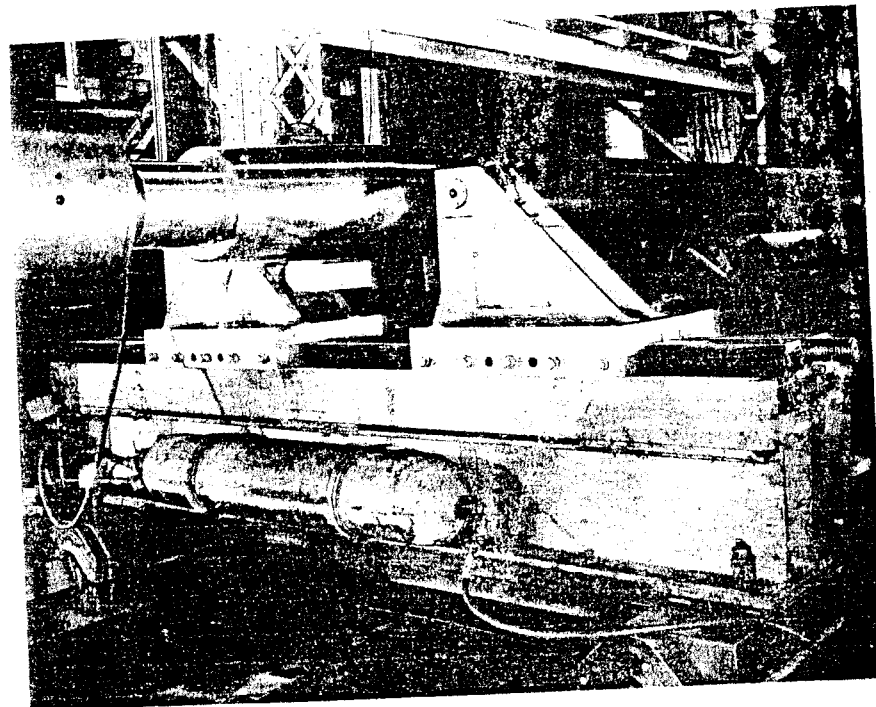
NEWPORT NEWS ROLLING EQUIPMENT SHOWN SURFACE COLD ROLLING A PROPELLER SHAFT FOR THE AIRCRAFT CARRIER U.S.S. RANGER (CVA 61) - "SMOOTHING" ROLLER ON NEAR SIDE.
